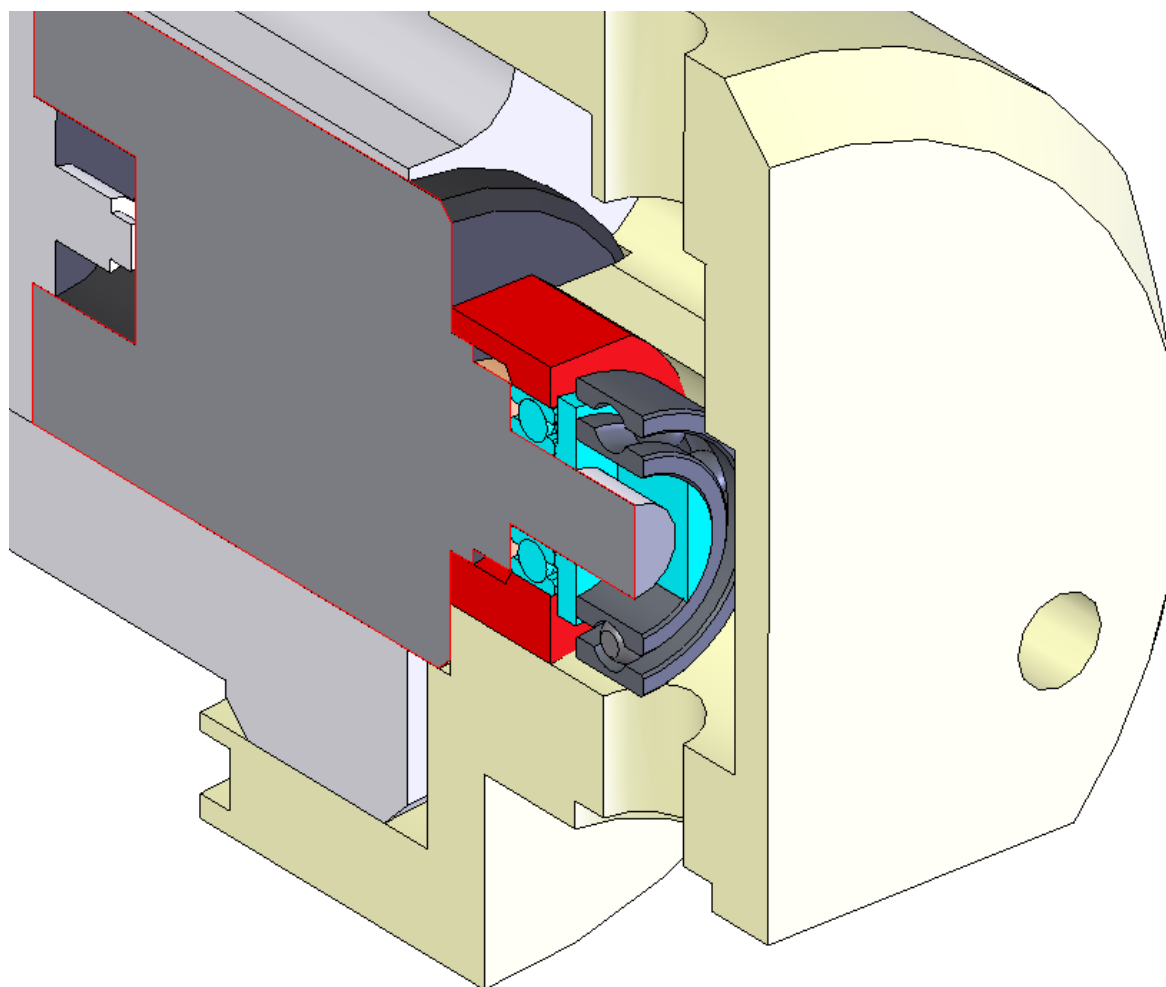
CAD Section showing modifications taken after stress analysis, before carrying out test 9.
